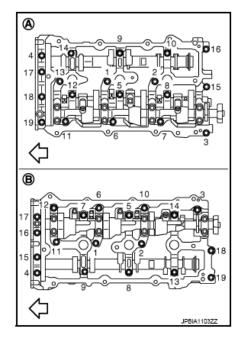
VVEL Ladder Assembly Mounting Bolt Tightening Sequence Courtesy of NISSAN NORTH AMERICA, INC.
